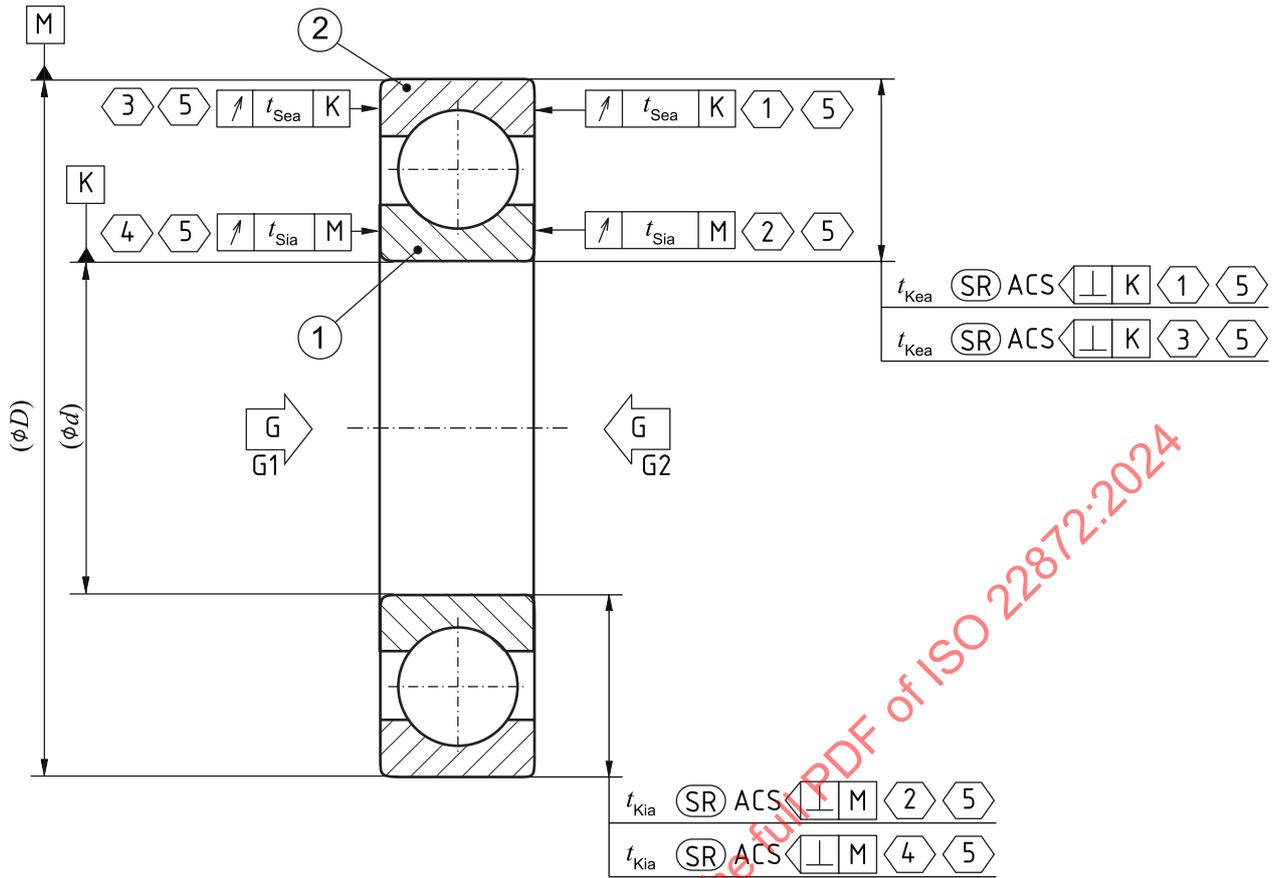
Geometrical tolerancing for single components of bearing with cylindrical bore
